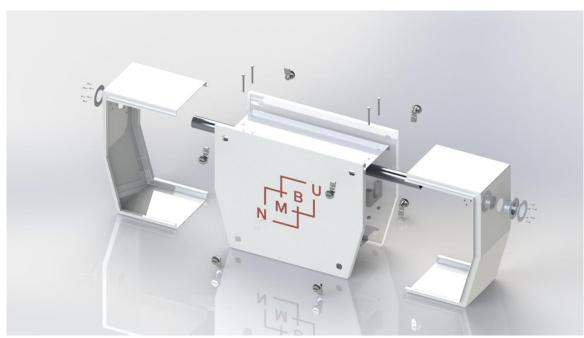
The outer electronic compartment shells are welded together and the lids are mounted with a locking device. The insides contains of the frame tube, shelf, bottom drain plate, and its mounting brackets.
